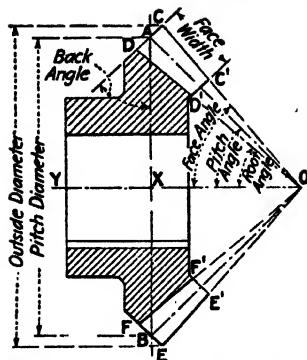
Directions for laying out miter gear. Gear selected, 4 DP-20 teeth.
